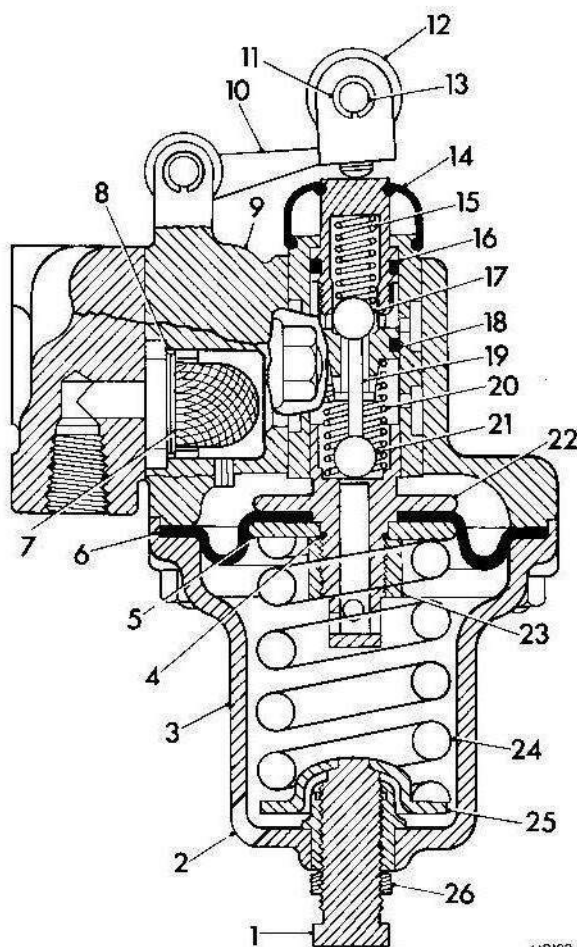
SECTIONED VIEW OF THROTTLE CONTROL VALVE
